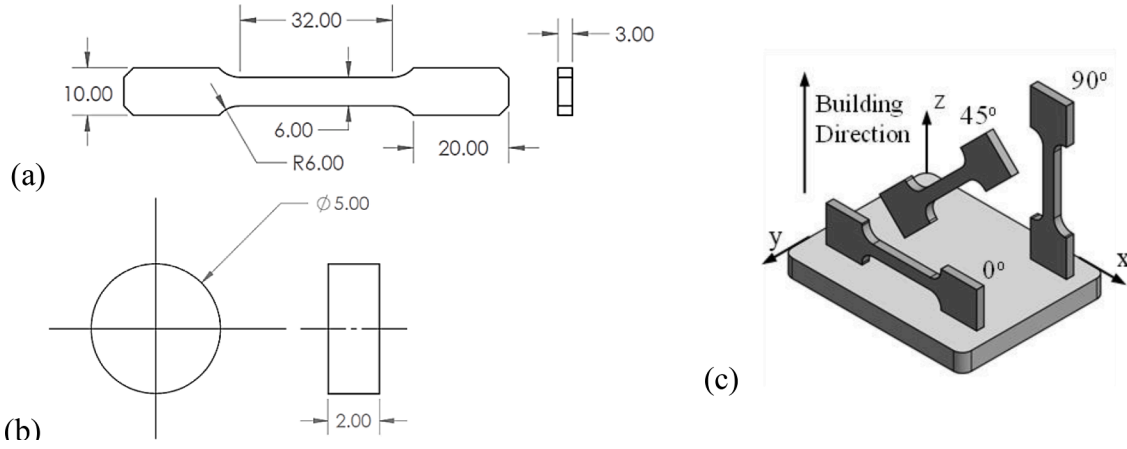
(a) Tensile specimens based on ASTM-E8, (b) compressive specimens and (c) specimen distribution within the build chamber. (all dimensions in mm).
